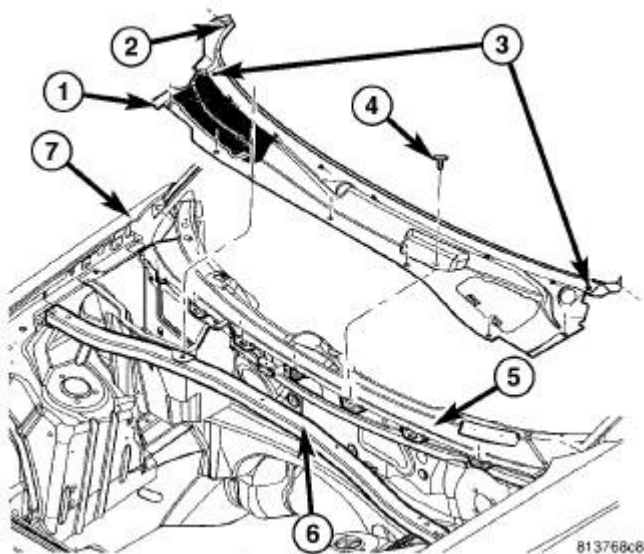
Cowl Panel, Push-Pins & Fasteners
